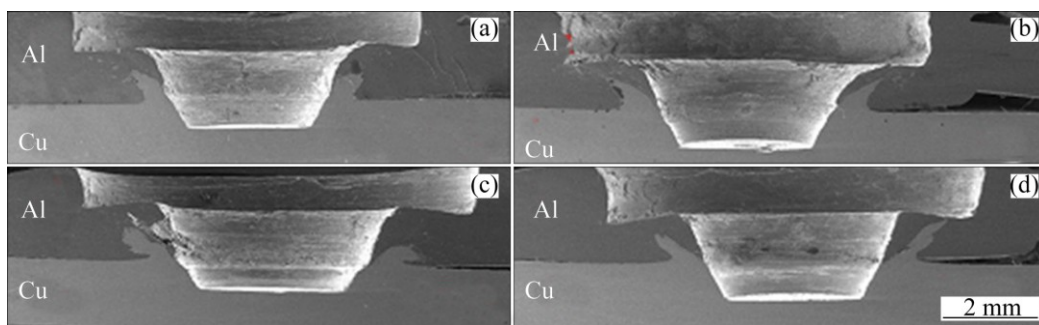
Micrographs of cross-sections of friction stir spot welds produced by flat pin and shoulder tool: (a) CCS_800_0.5; (b) CCS_800_1; (c) CCS_1200_0.5; (d) CCS_1200_1
